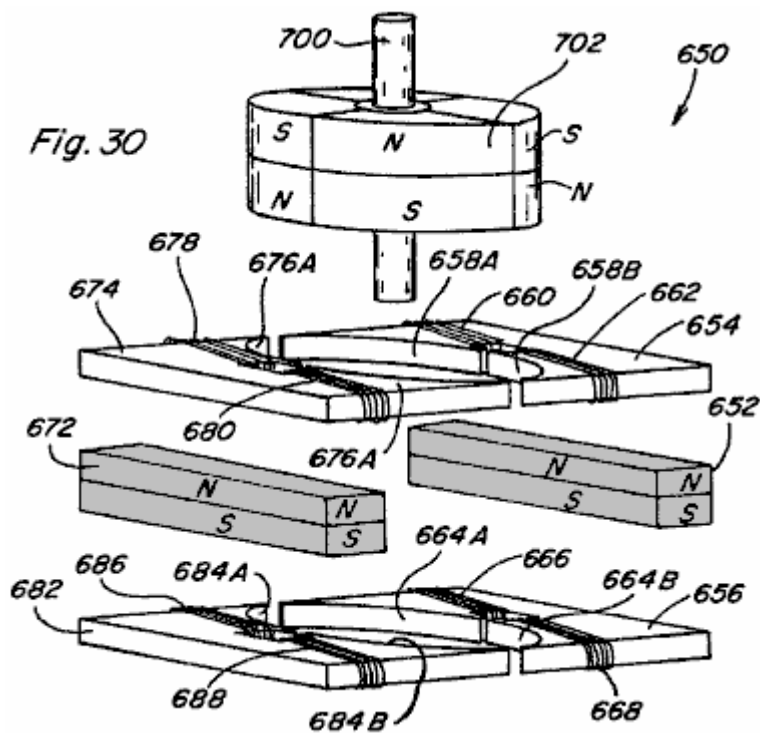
is an exploded partial perspective view of another embodiment of a rotary motion device;
